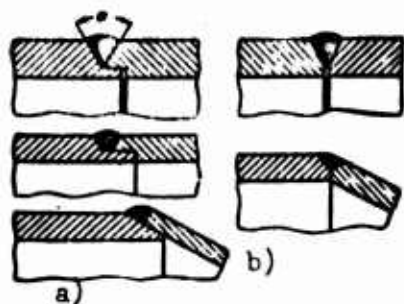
Joints for automatic welding under flux of parts of small diameter.
